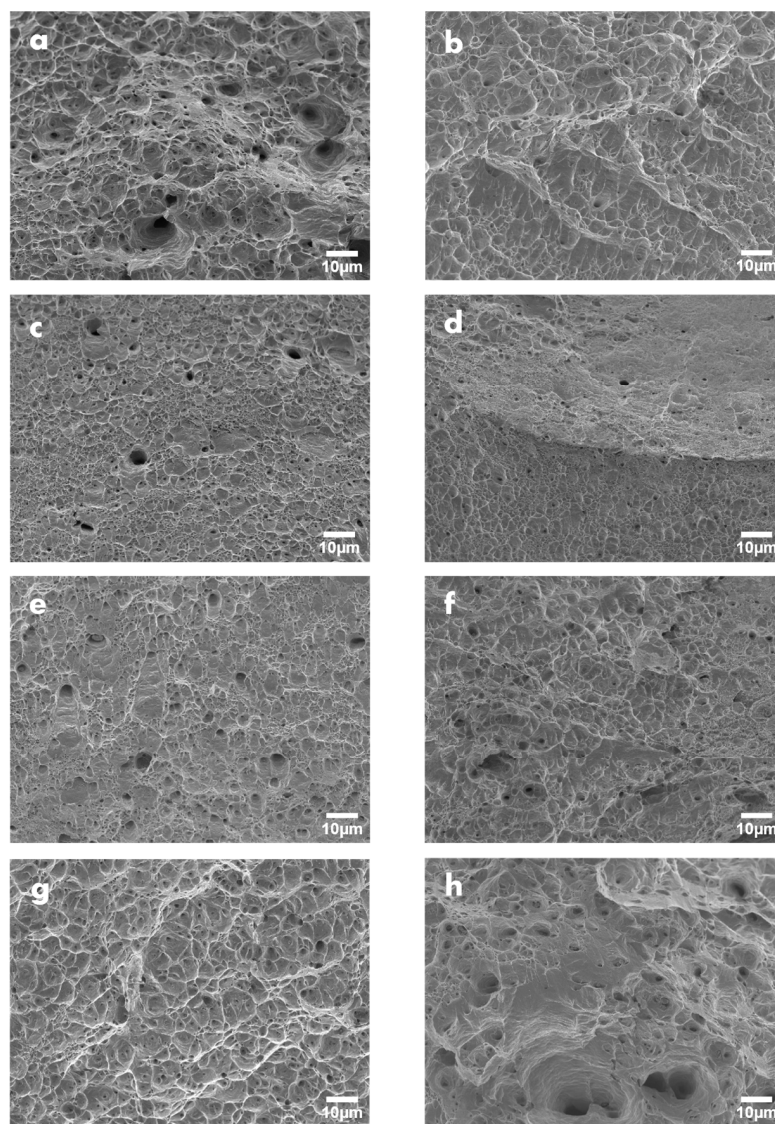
SEM fractographs of cross-weld tensile Specimen 1 at $\times 1000$ magnification taken from sequential through-thickness positions on the two opposing fracture surfaces. (a,c,e,g) Views from one side of the fracture surface, from the outer surface through the upper mid-thickness and lower mid-thickness to the inner surface. (b,d,f,h) Corresponding positions on the opposite fracture surface, including the mid-thickness transition zone (d) and the shear-lip region near the outer surface (h). All regions exhibit a ductile dimpled morphology characteristic of microvoid coalescence, with no evidence of cleavage or intergranular decohesion.
